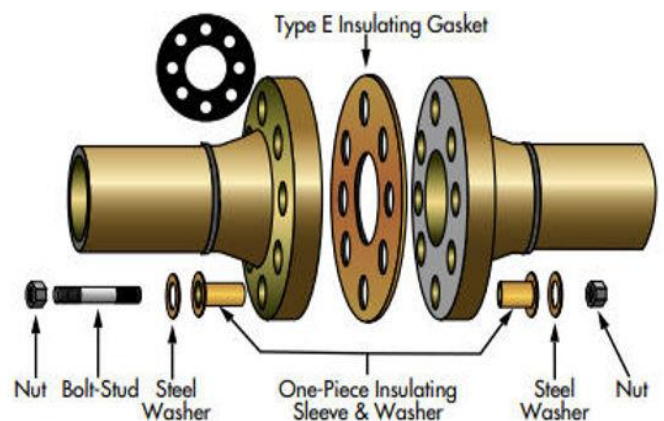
Assembly of Two Insulated Flanges using Sleeve
